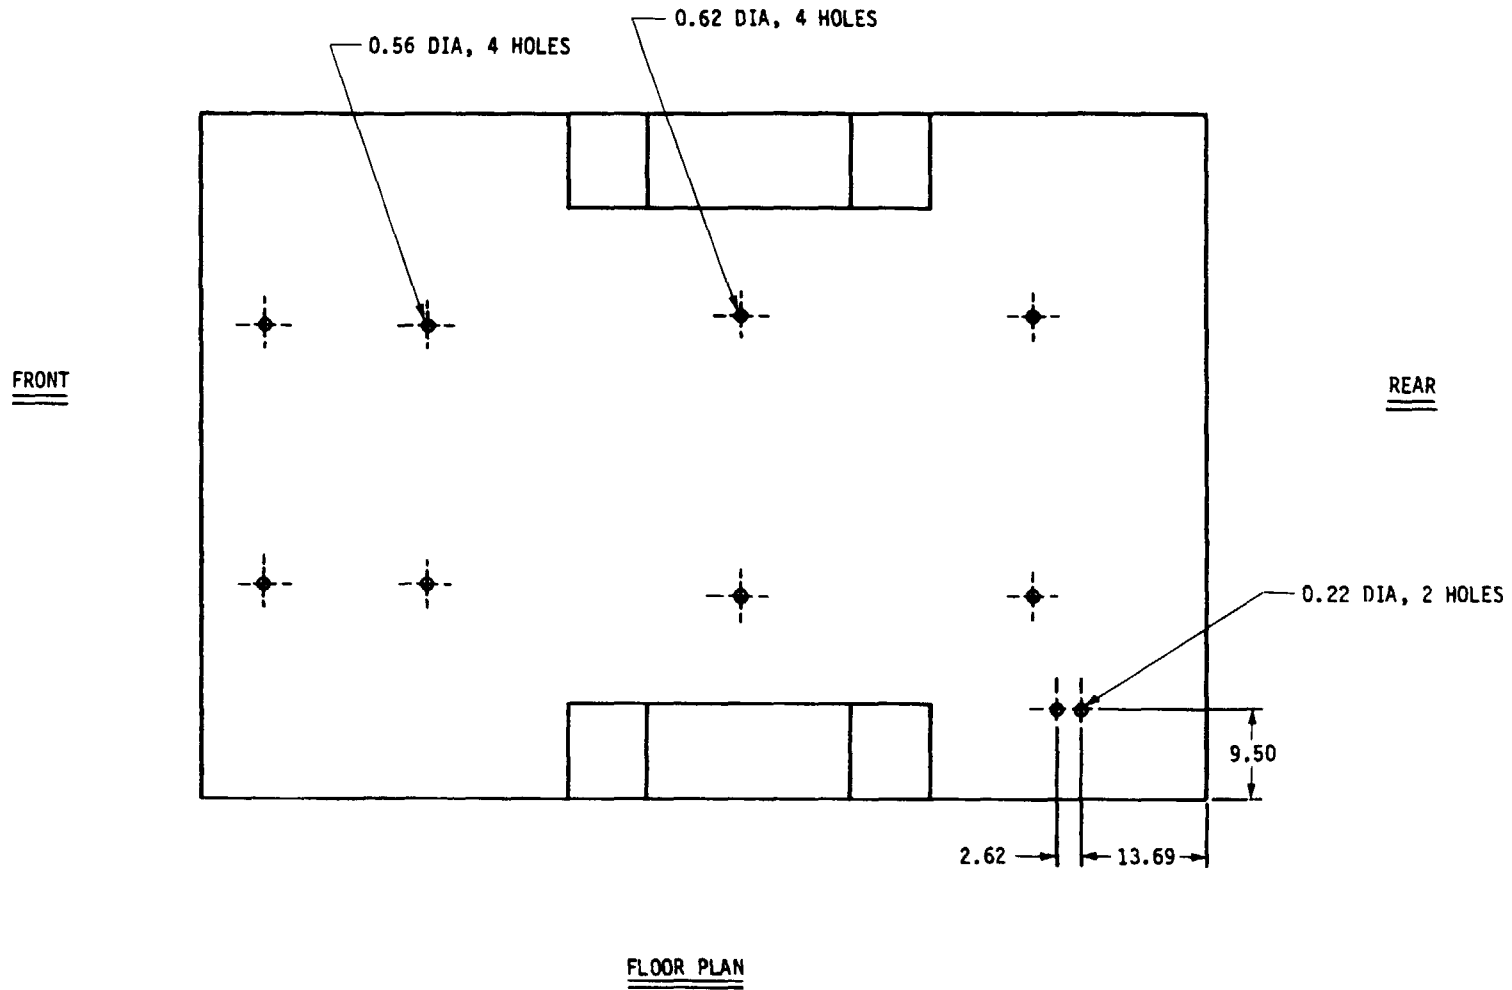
Hole Dimensions for Mounting Holes and Strap Loop, Unit 4, M105A2, Floor Plan.
